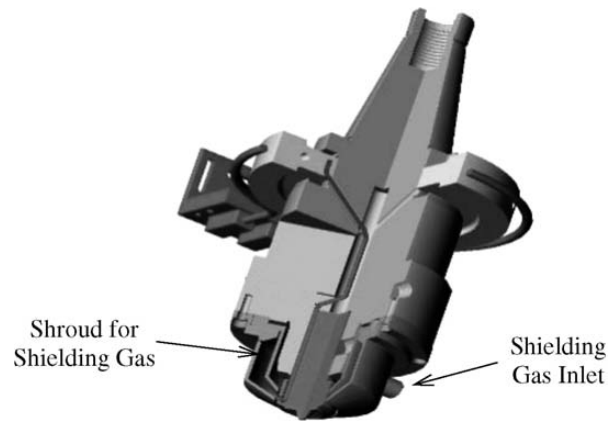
Geometry of the CS4 tool used in the welding<sup>10,11</sup>
